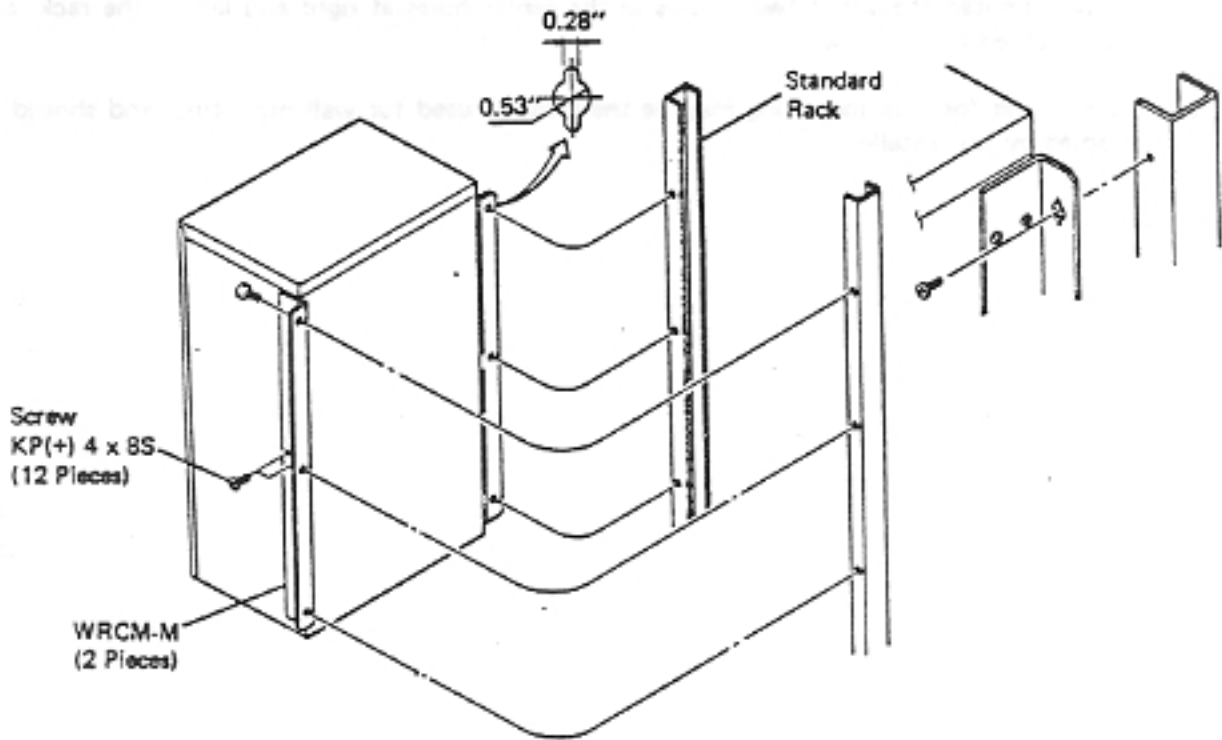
(2)(b) EX-824CM Rack-Mounting Method
